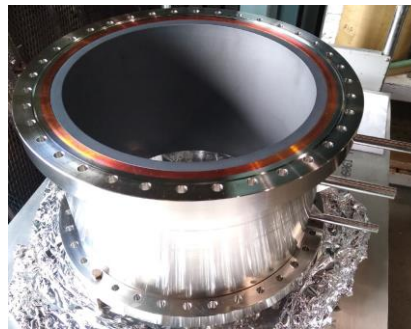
Shrink-fitted SiC HOM absorber assembly.
